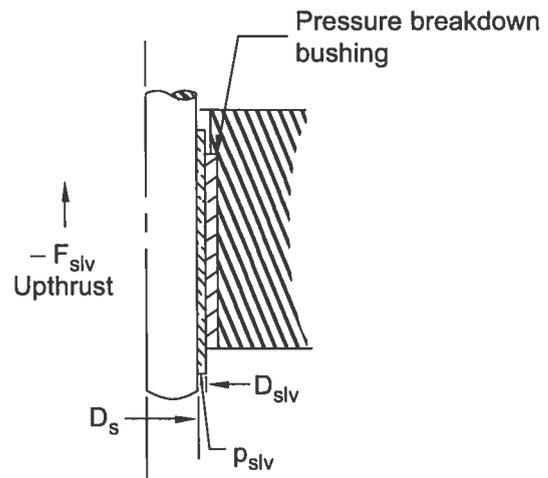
Shaft sleeve through pressure breakdown bushing
